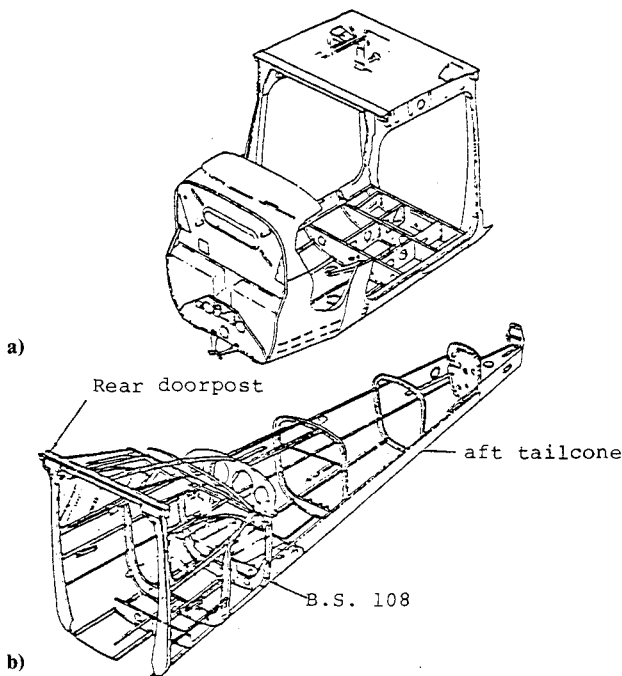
Fuselage primary structure. a) Front and center section assembly. b) Aft cabin and tail cone assembly.
